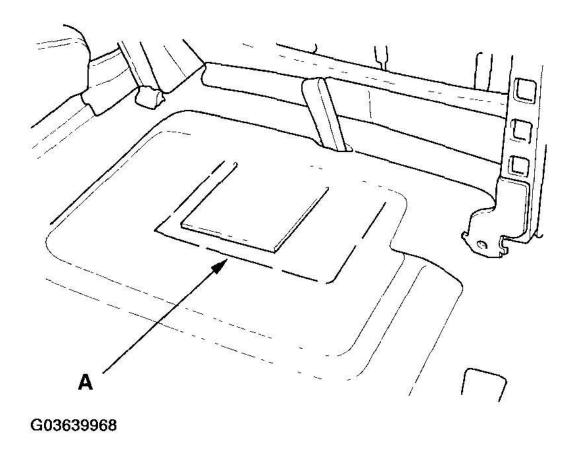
Cutting Carpet At Dotted Line Courtesy of AMERICAN HONDA MOTOR CO., INC.
